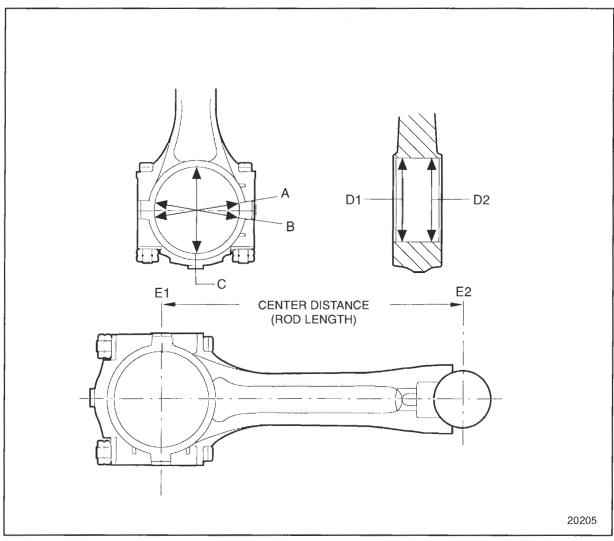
Dimensional Inspection of Cross–head Piston Connecting Rods
